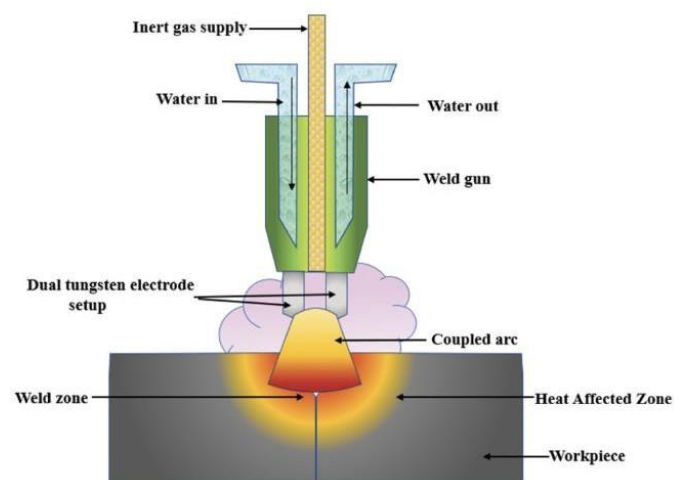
A image showing twin tungsten inert gas welding [15].
